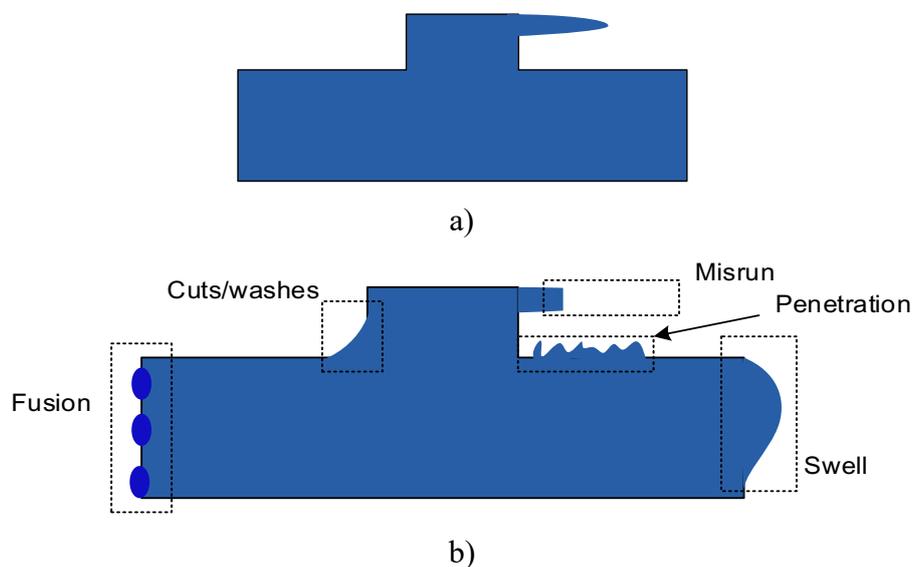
Schematic showing a) desired casting and b) casting with various types of defects (cuts/washes, fusion, misrun, penetration, and swell) due to poor moulding practices.
